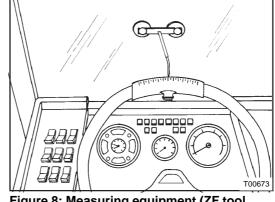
Measuring equipment (ZF tool, part No. 7418798452)
